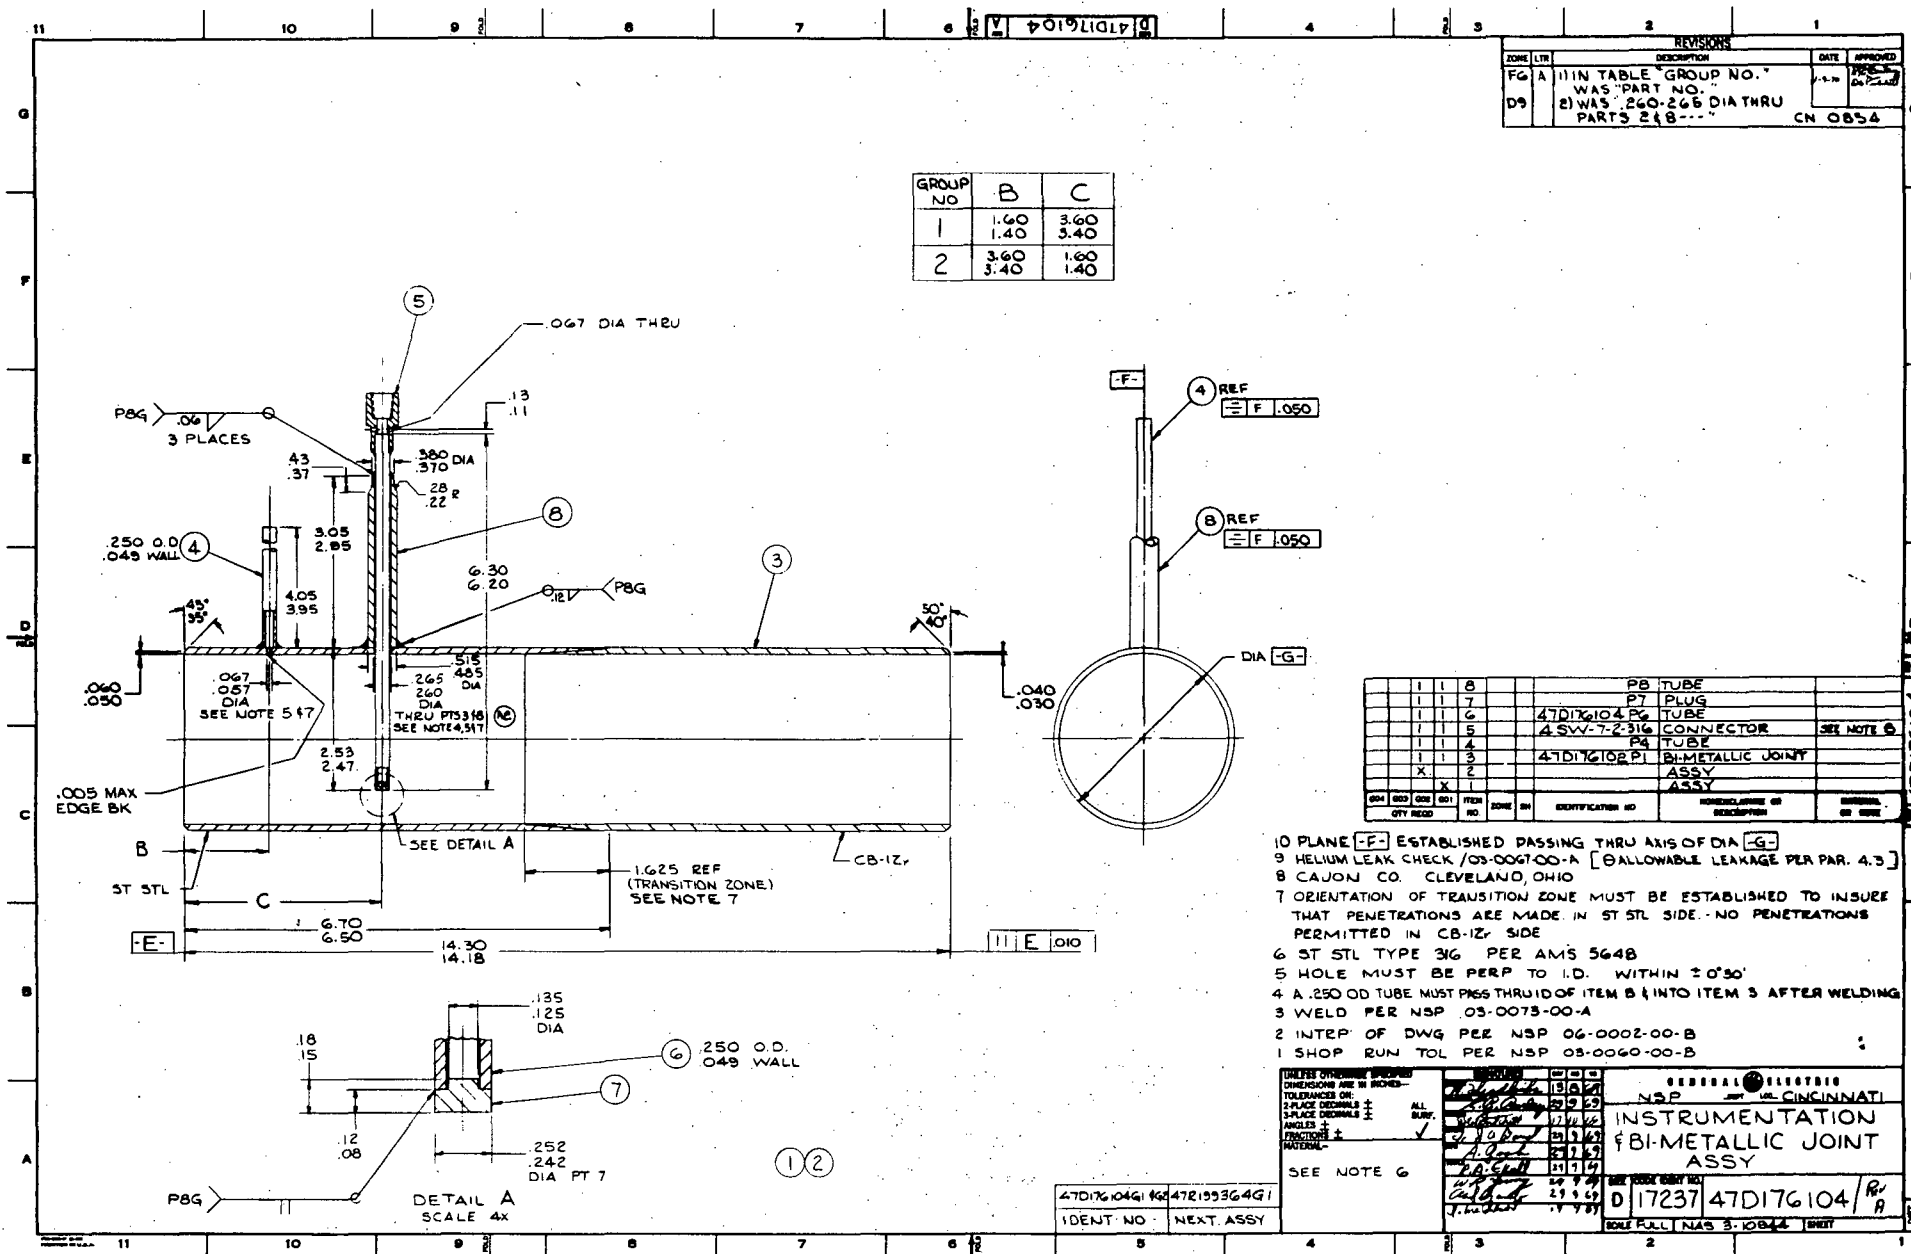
Bimetallic Joint Assembly. (Dwg. No. 47D176104)
